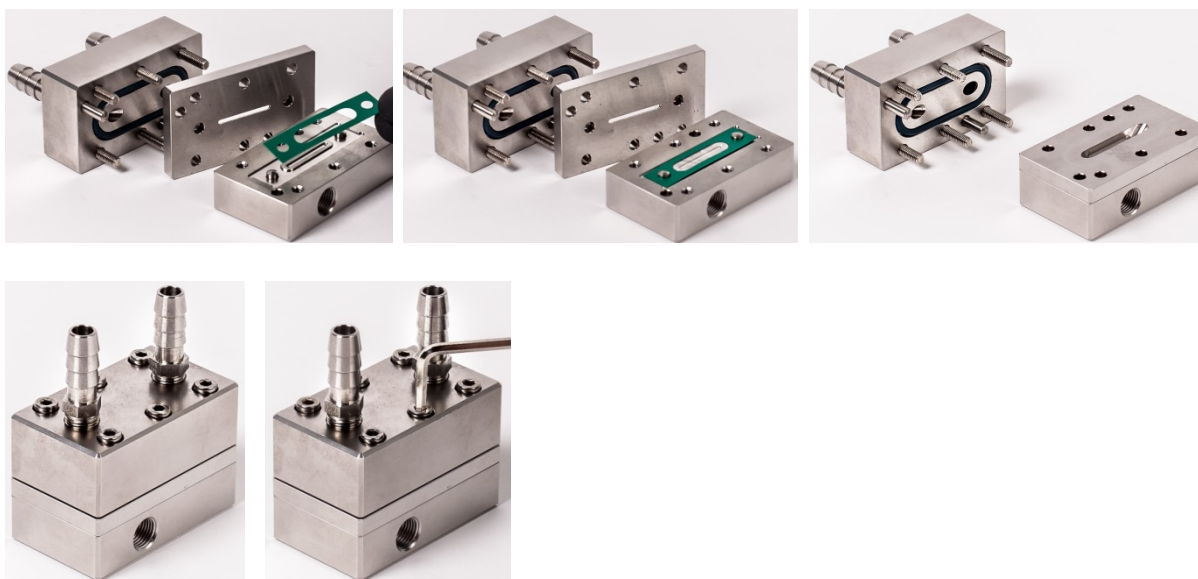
Inserting a new standard membrane in the bypass module stainless steel
